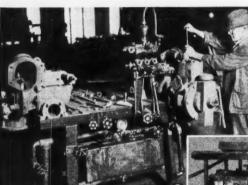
Stoker engine work is handled on this especially-equipped table. Fig. 9 —Racks like this are placed wherever needed and all tools and parts are kept off the floor.
